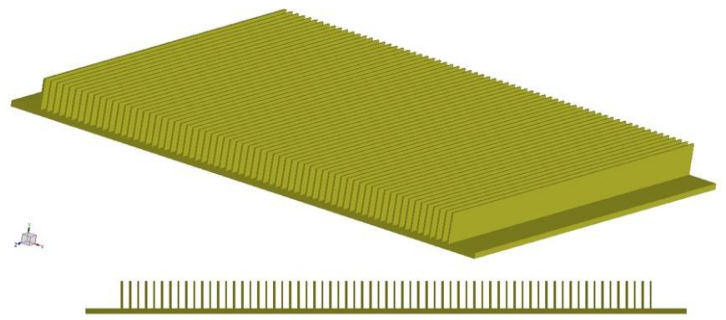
shows the detailed view of heat sinks in power amplifier used for analysis
